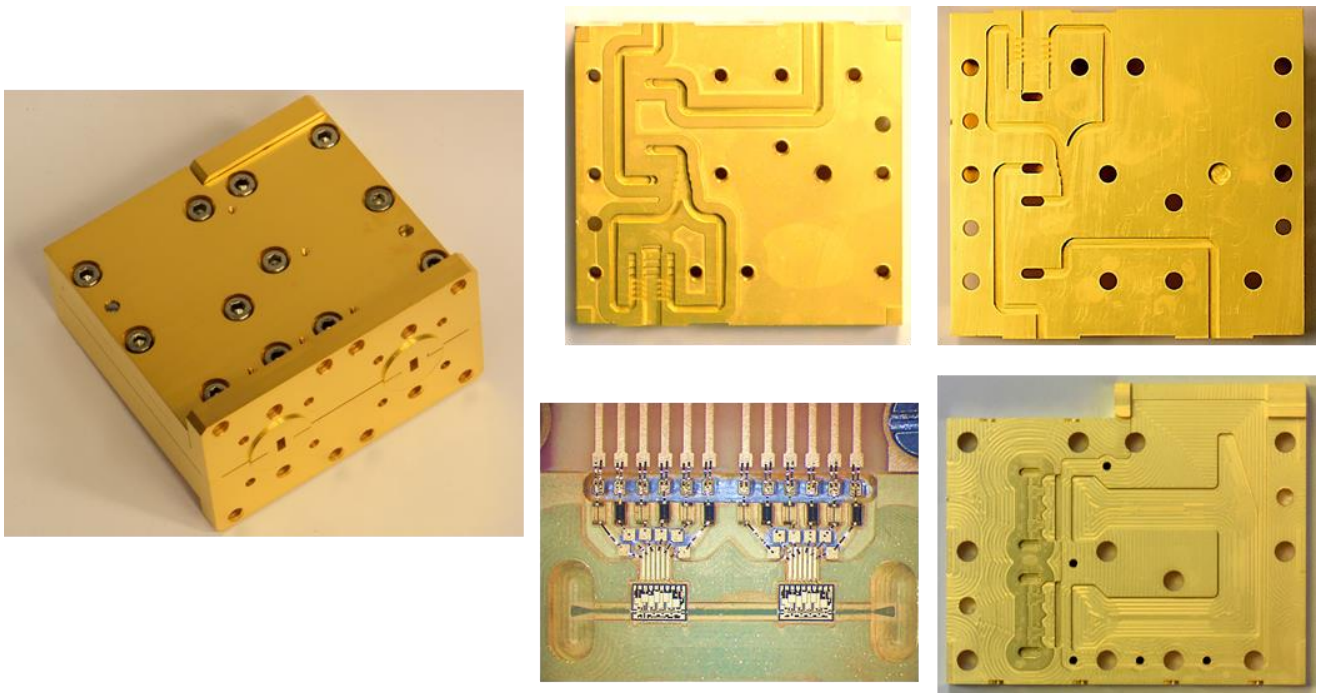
Left:* Single-pixel module, assembly of three parts. External dimensions of the fully assembled active OMT are $43 \times 25 \times 35 \text{ mm}^3$. *Top middle & right:* OMT-parts with square-WG input, two WG outputs and milled 90° bends. *Bottom right:* LNA-part with one gain stage for each polarization. *Bottom middle:* Close-up of fully assembled single polarization gain stage showing wave-guide to microstrip transitions with backshorts, two cascaded LNA chips and components for DC-bias.
